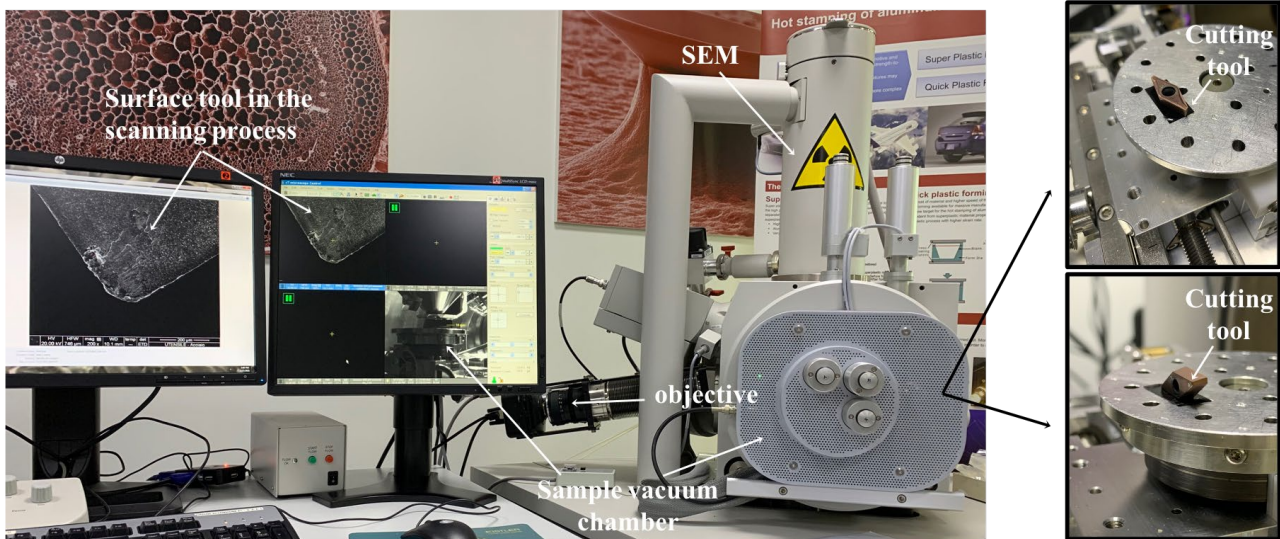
FEI QUANTA 450™ SEM setup during cutting tool image acquisition with different views of the tool placed inside the vacuum chamber.
